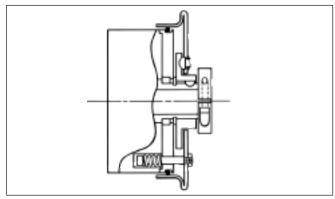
SWITCH ACTUATING PLATE ASSEMBLY
